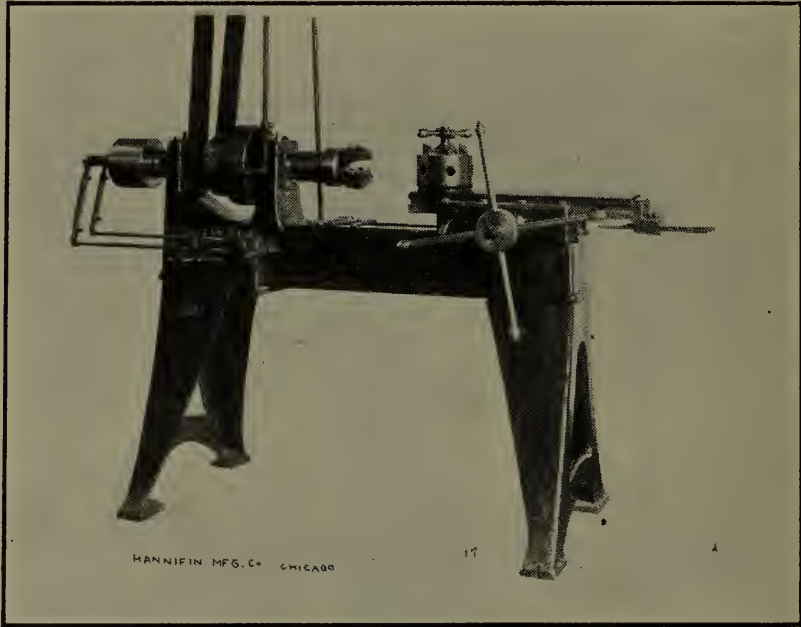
An air operated alligator chuck applied to a small turret lathe.
